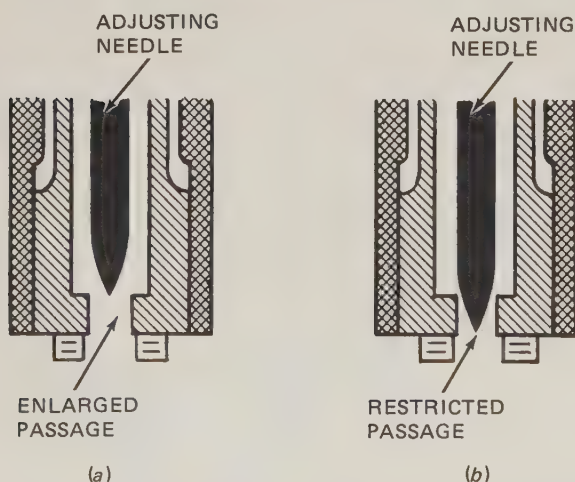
(a) Carburetor adjustment needle and seat showing enlarged passage allowing more fuel to flow. (b) Restricted passage allowing less fuel to flow.
